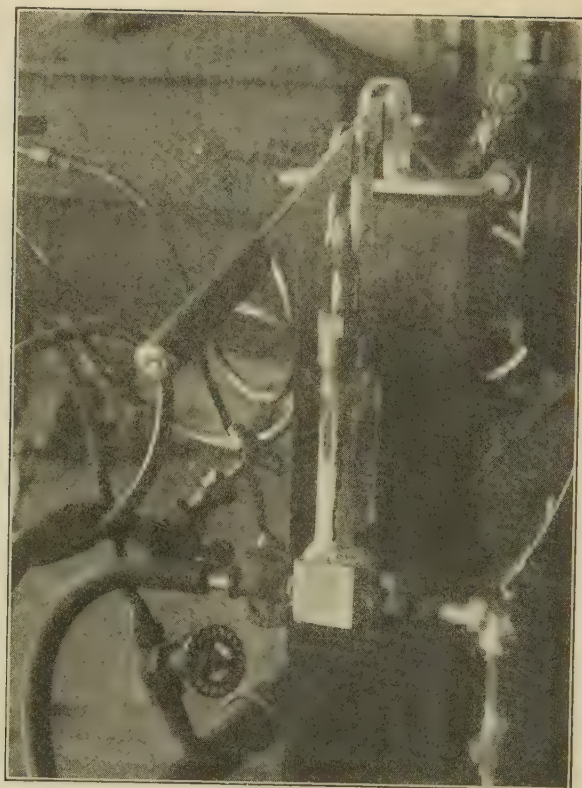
Arc-welded acetone pump for gas plant.
